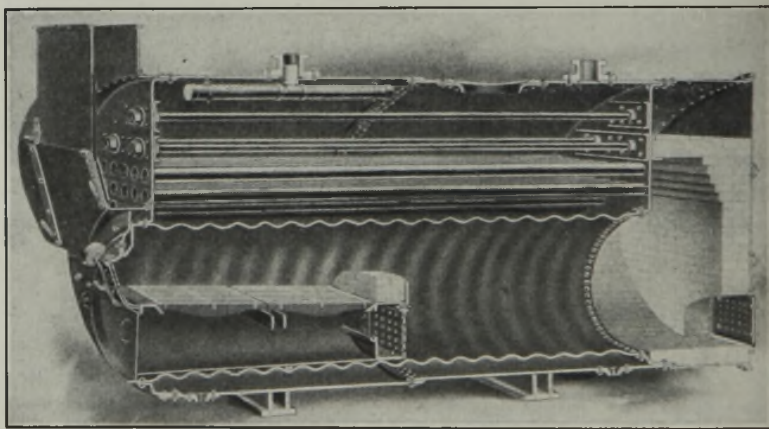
Scotch marine boiler with brick combustion chamber.
